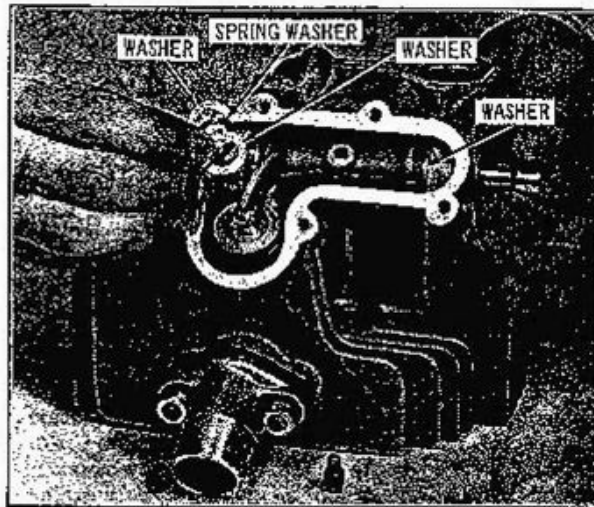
B-15. Assembling Rocker Arm Shaft and Thrust Washers - Intake Valve
